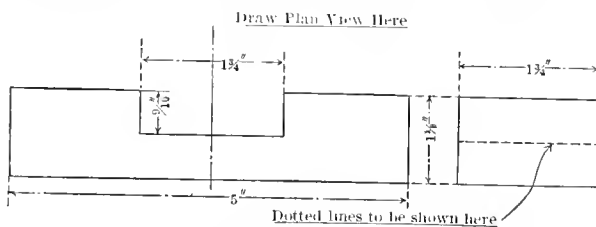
SECOND EXERCISE—A LAP JOINT DETAIL.
